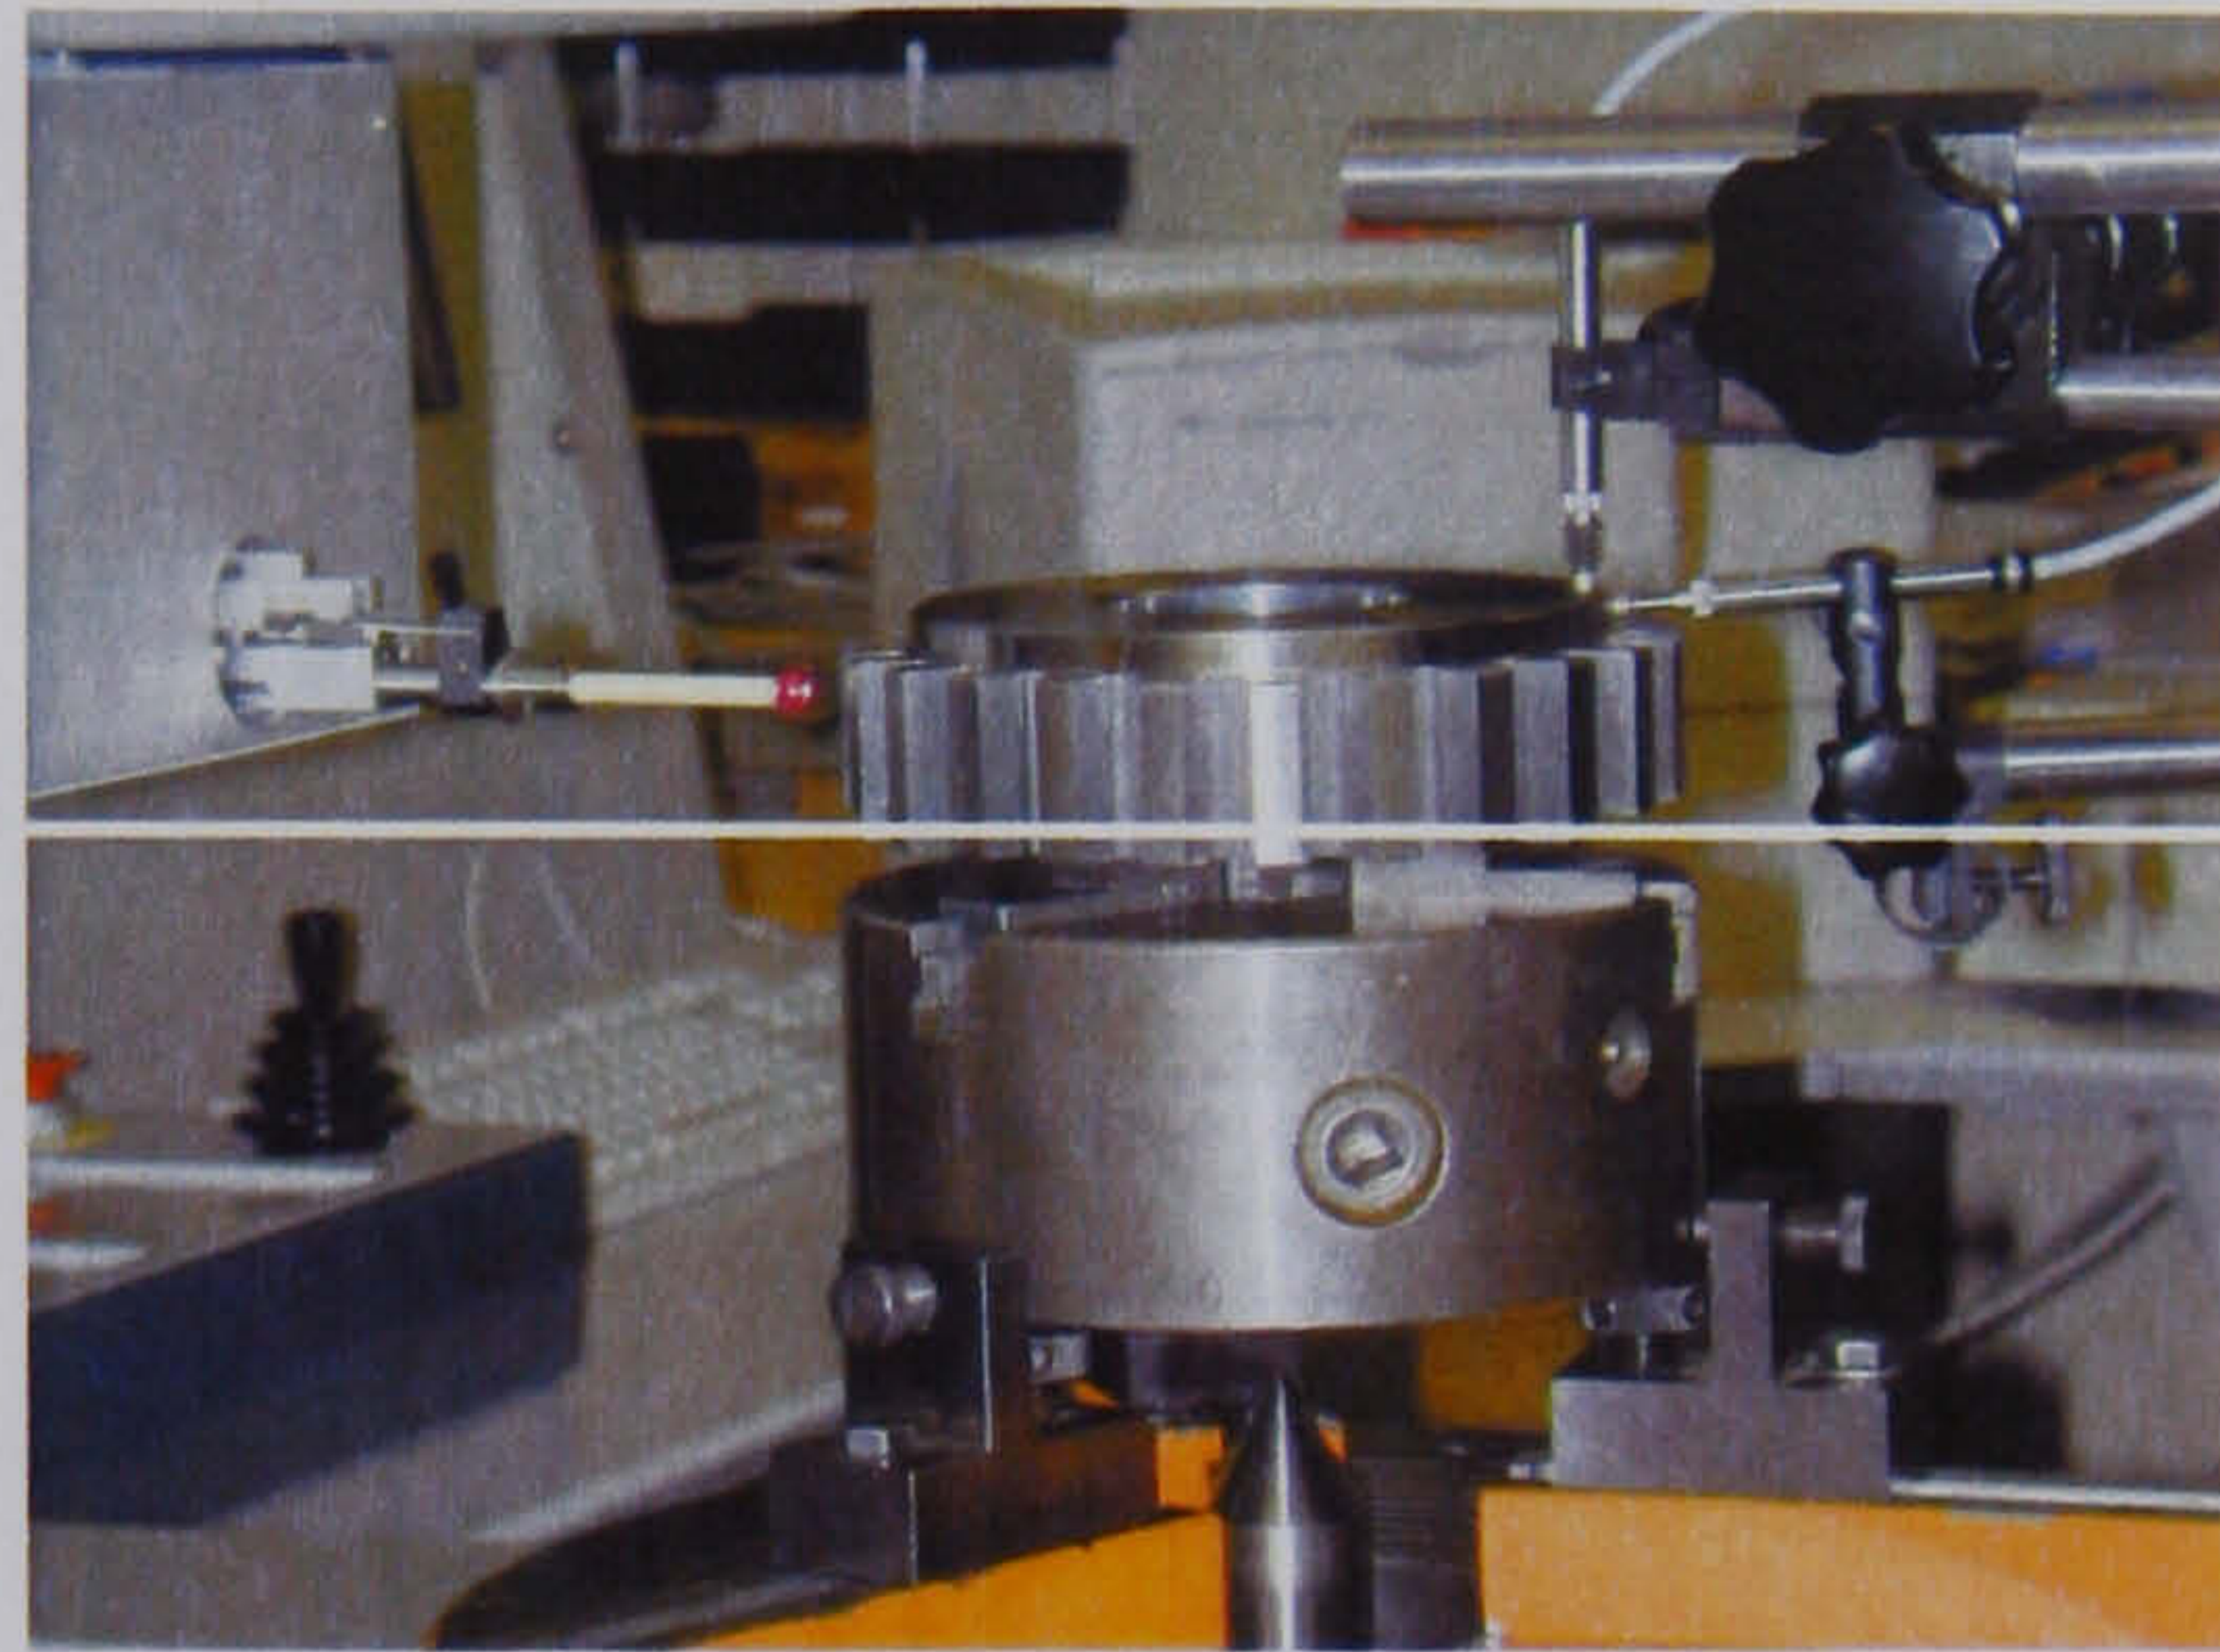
Use of Feinpruf LVDT probes to measure radial and axial runout on a gear mounted directly on the rotary table.
